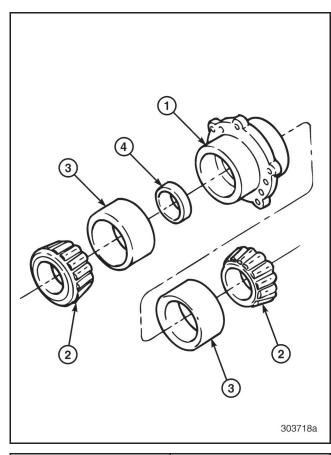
Front-Drive Shaft Bearing Retainer Locator
